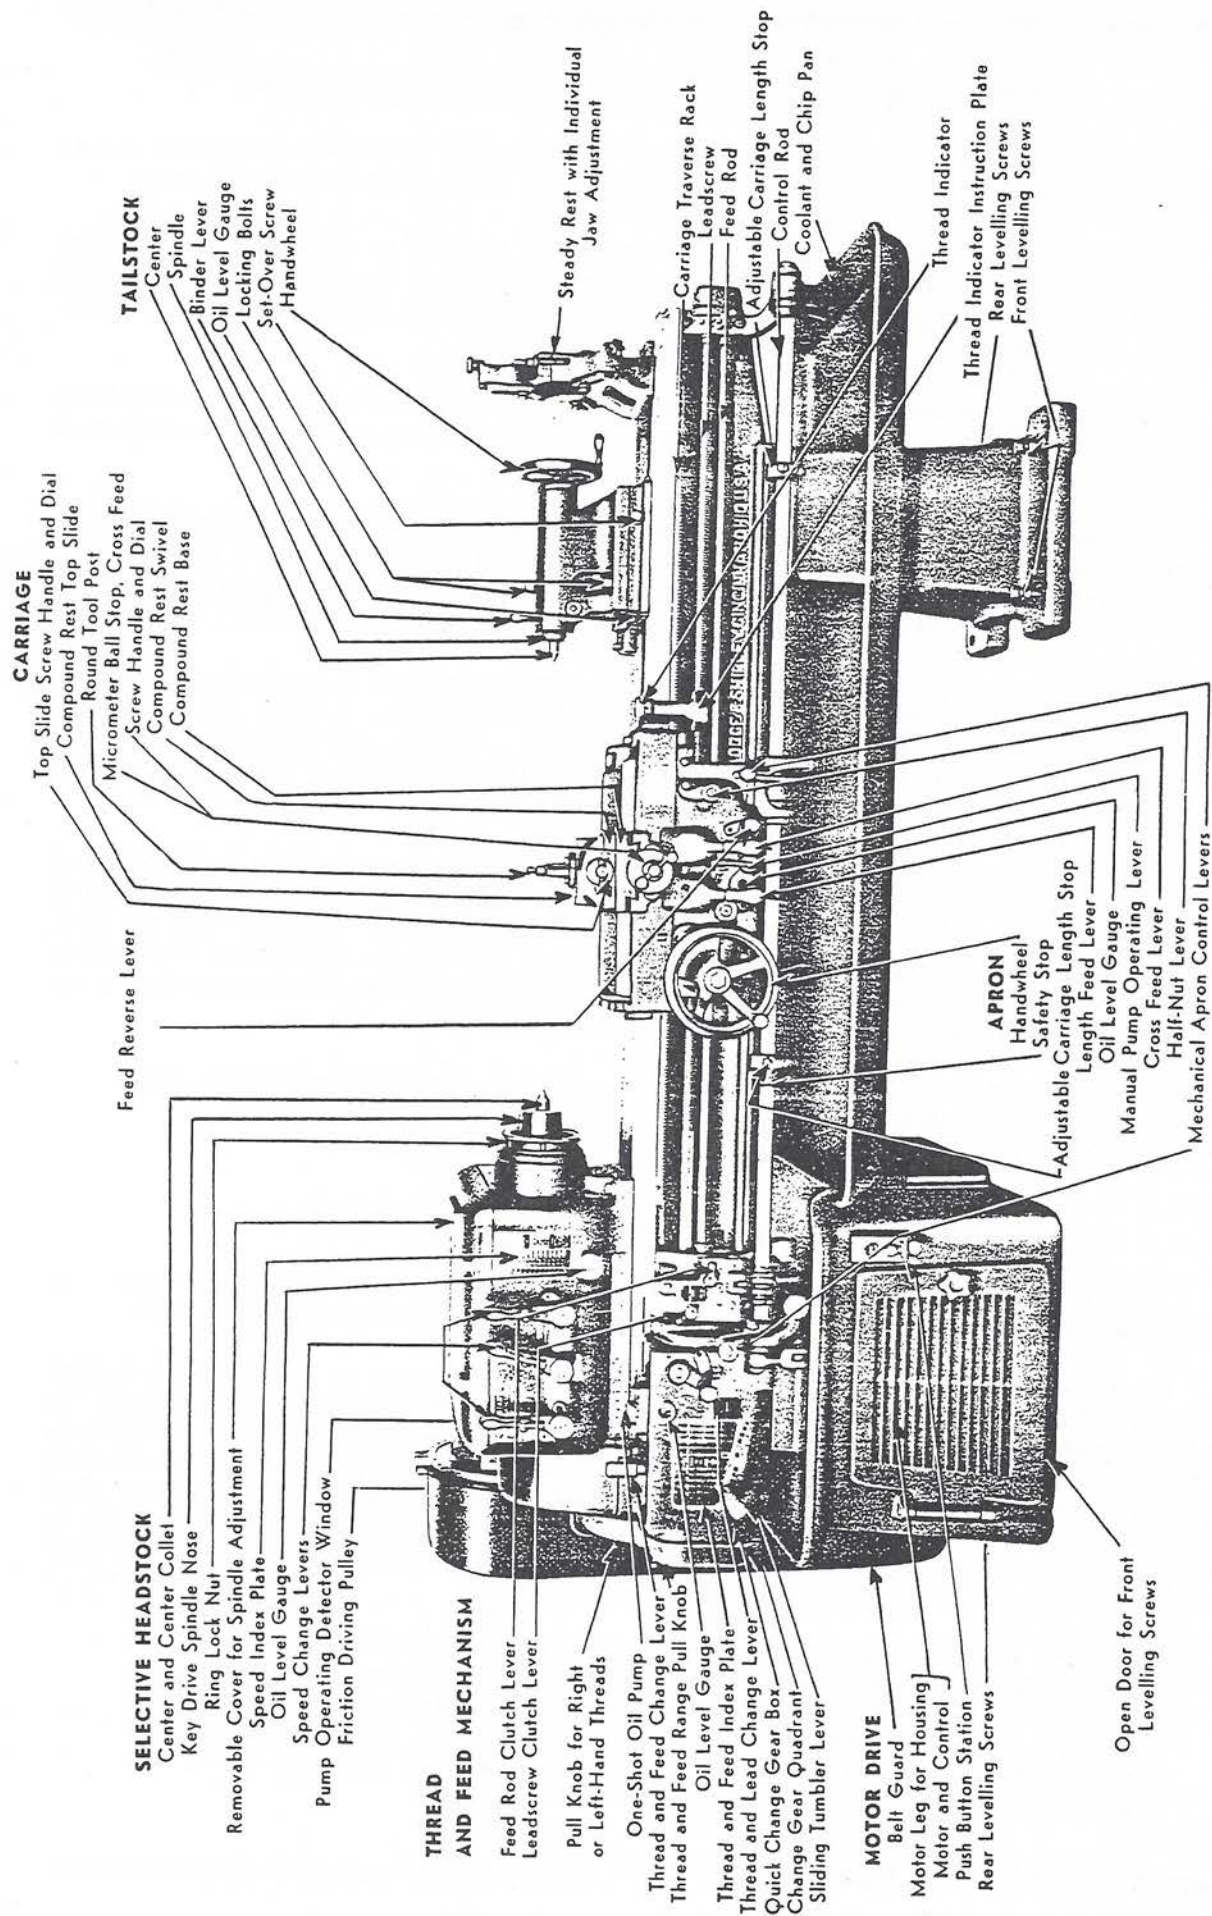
Selective Head Lathe Without Reverse To Leadscrew
